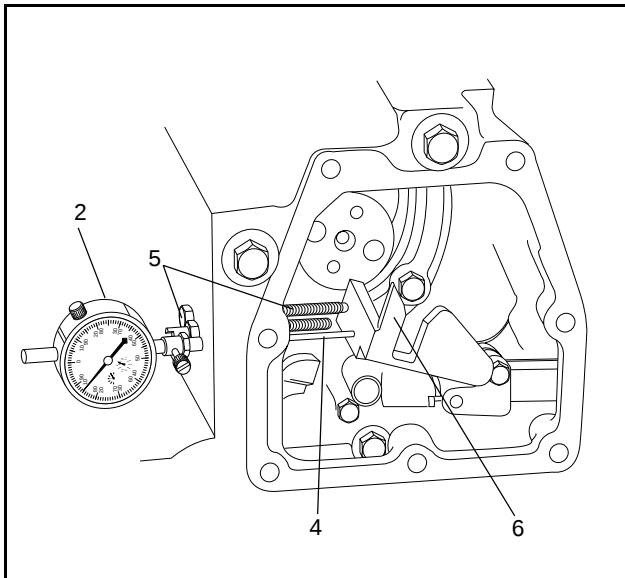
Typical Example Of A Dial Indicator In Position (Cover Removed Only For Illustration)
